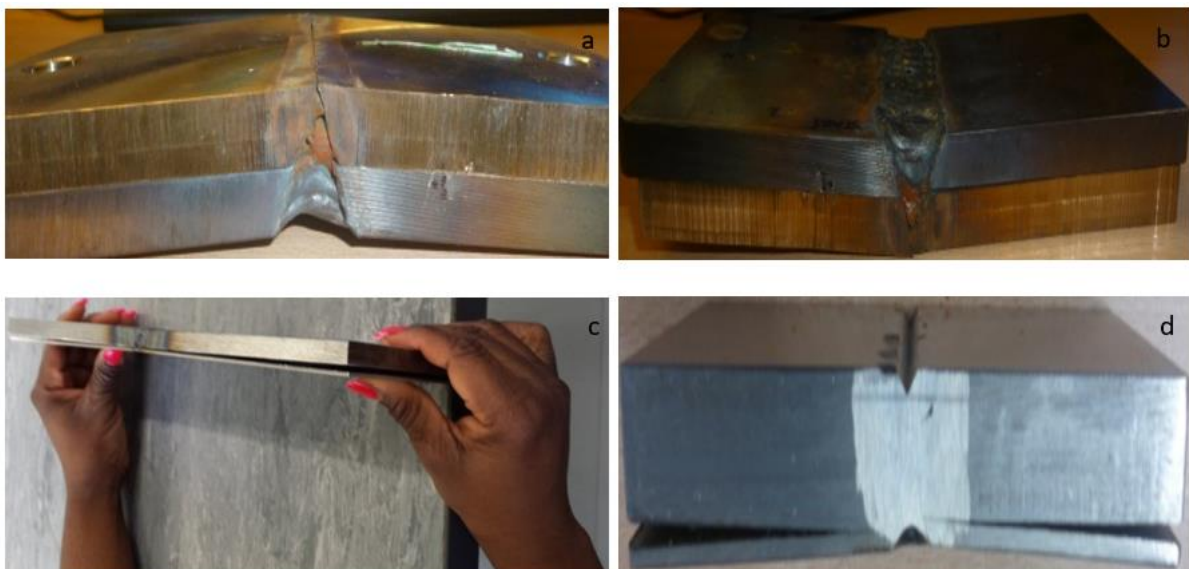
An experiment showing weld deformations. (a) and (b) show the side view of a deformed 12 mm clad weld not properly clamped into position. (c) and (d) show the same deformation, but with a 2mm clad weld.
